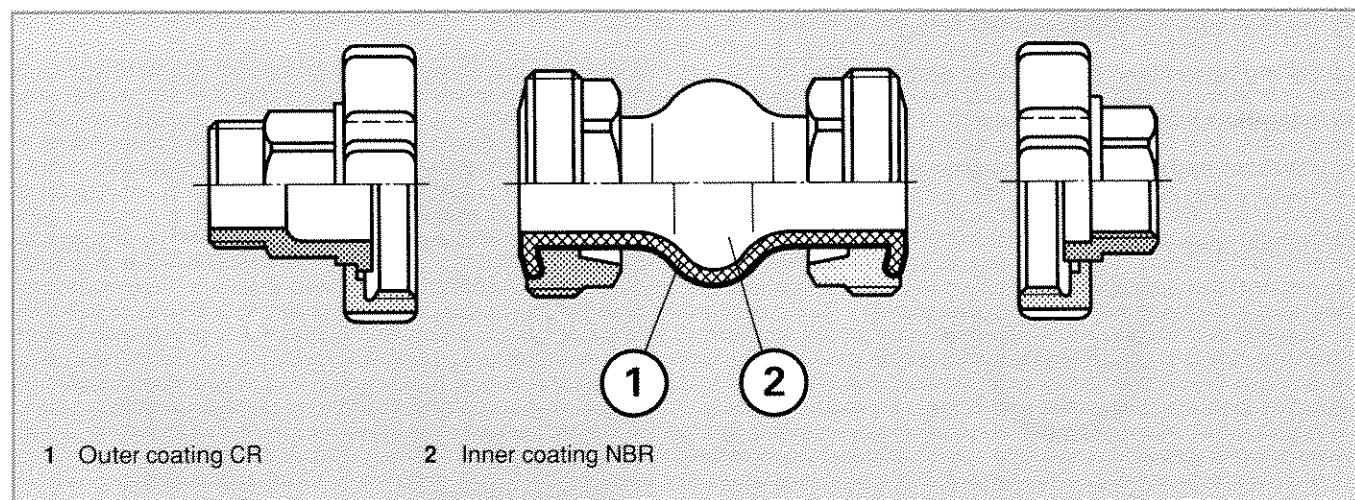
Expansion fitting for threaded connection 3/4 to (a) 1 1/2" BSP, external or internal thread, suitable for mineral oil and water-glycol
